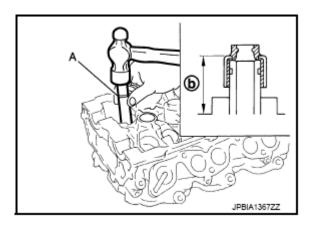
Pressing Valve Oil Seal Using Valve Oil Seal Drift Courtesy of NISSAN MOTOR CO., U.S.A.
